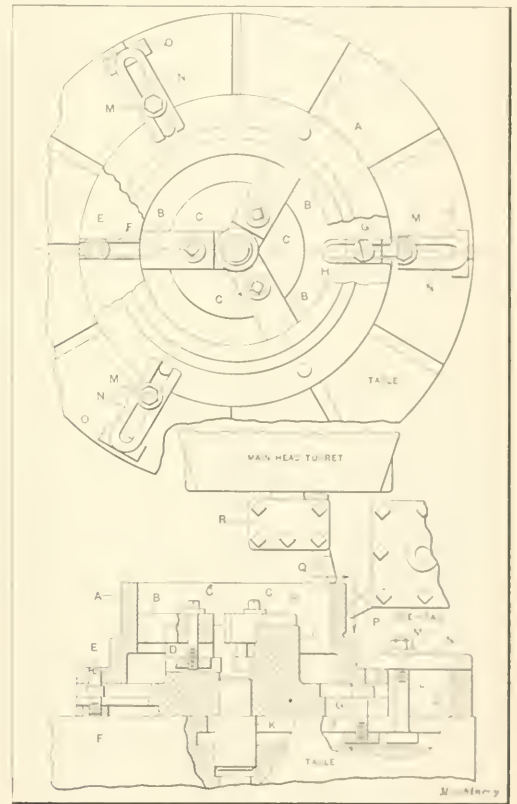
Method of holding Three Sizes of Work which has been bored and faced and has had the Holes drilled in Flange
